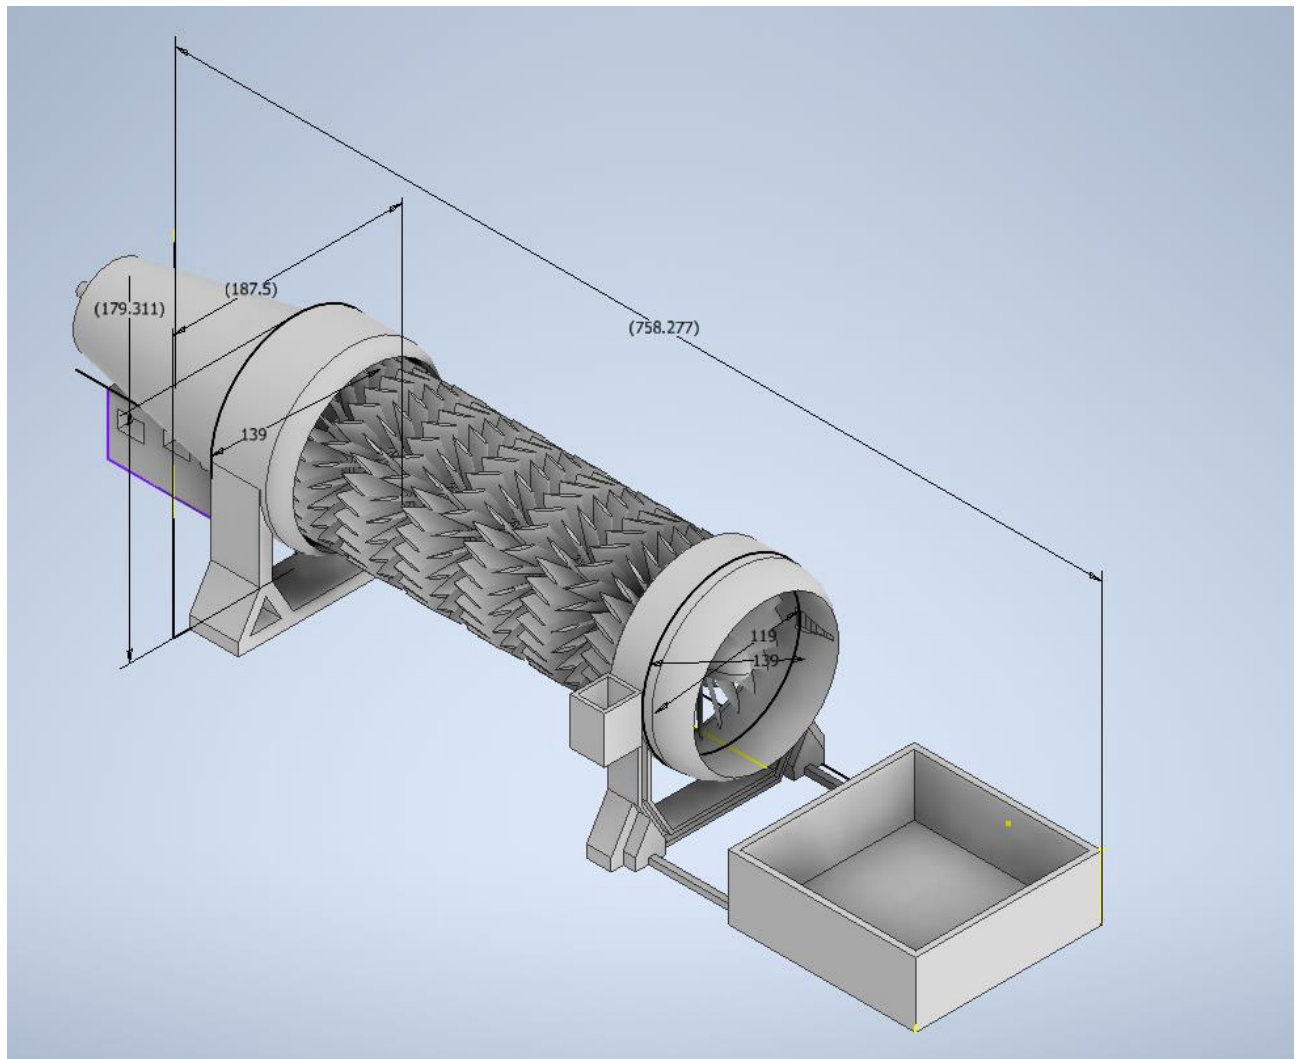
General Dimension of Aircraft Engine Compressor Learning Kit
